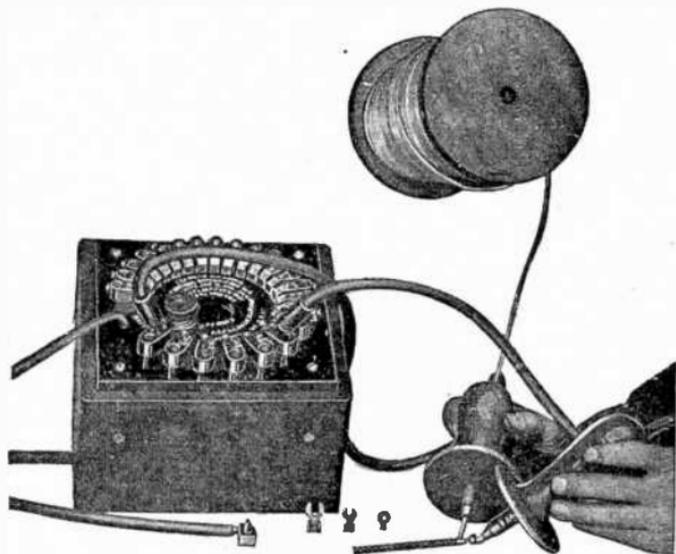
,216.—Chapman universal armeter used with carbon contact resistance soldering leads. Connect pair of No. 8 flexible leads to say 0 and 5V terminals.
